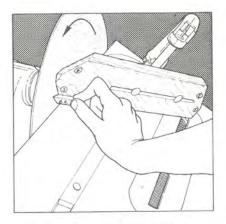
Resurface the offset (compound beveled) end of the bottom right guide block with the miter gauge set at 45° left and the table set at 30° right. The miter gauge should be reversed in the table slot.
